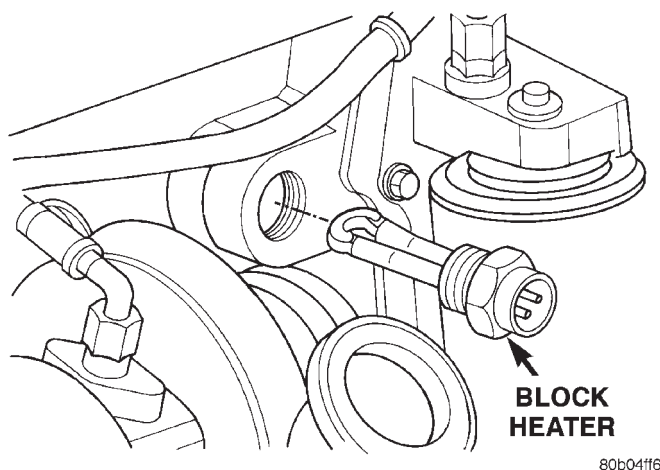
Engine Block Heater—5.9L Diesel Engine
